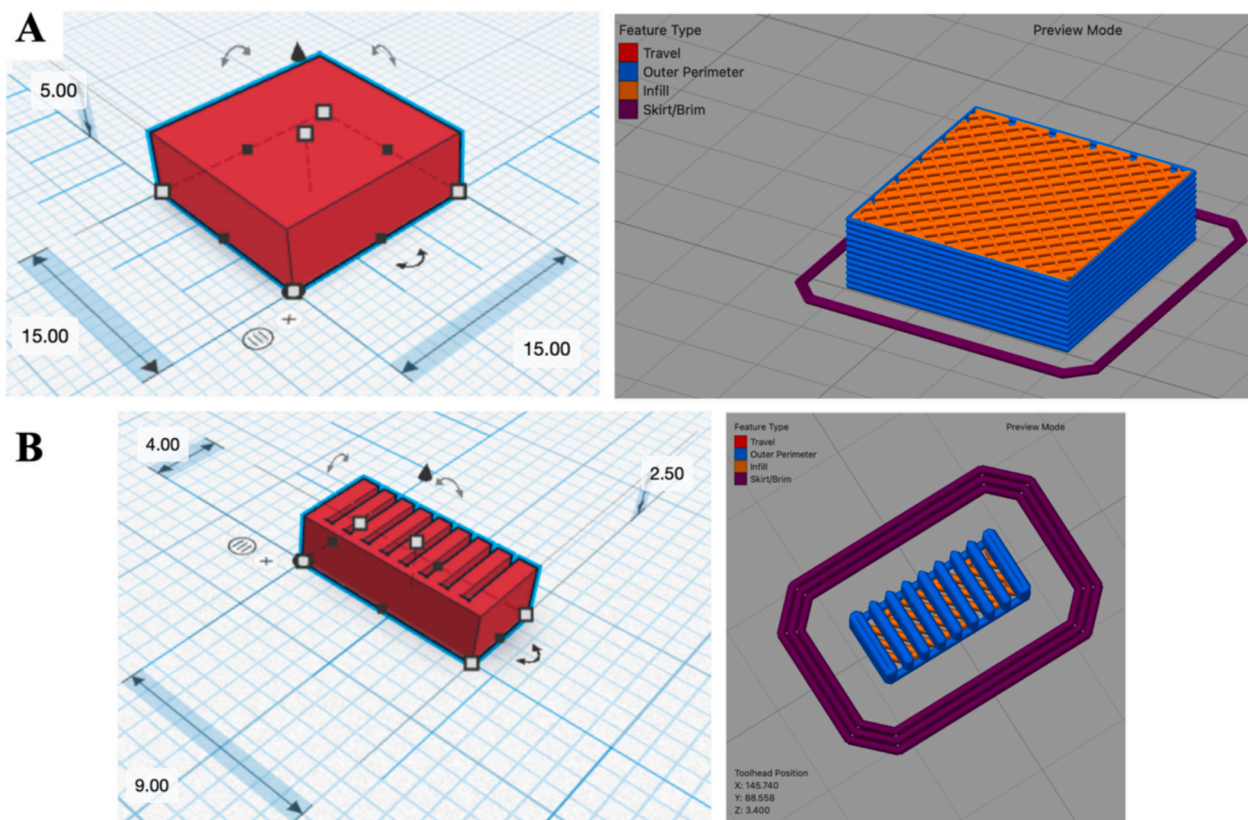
A) CAD design of a square-shaped scaffold (15 × 15 × 5 mm) (on the left) and printing preview of the CAD design after slicing (on the right); B) CAD design of the rectangular-shaped device (9 × 4 × 2.5 mm) (on the left) and printing preview of the CAD design after slicing (on the right).
